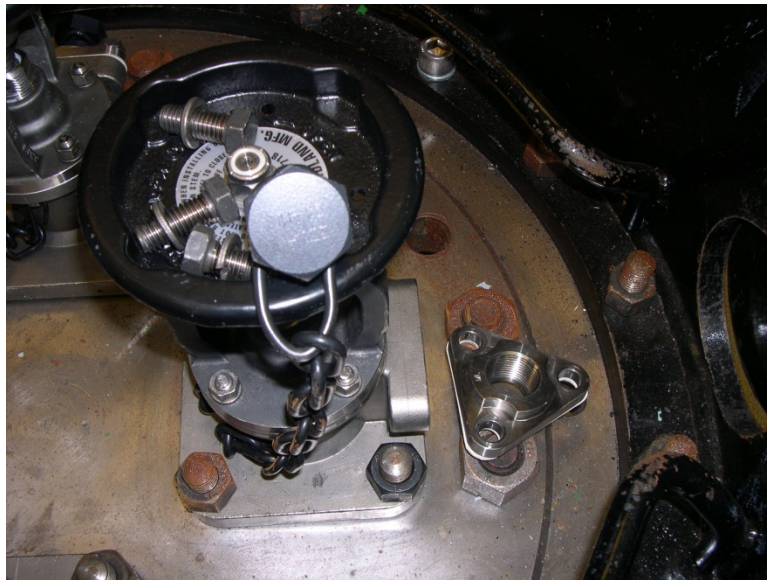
Midland Model A-718-HC Dual Valve with Flange Removed
